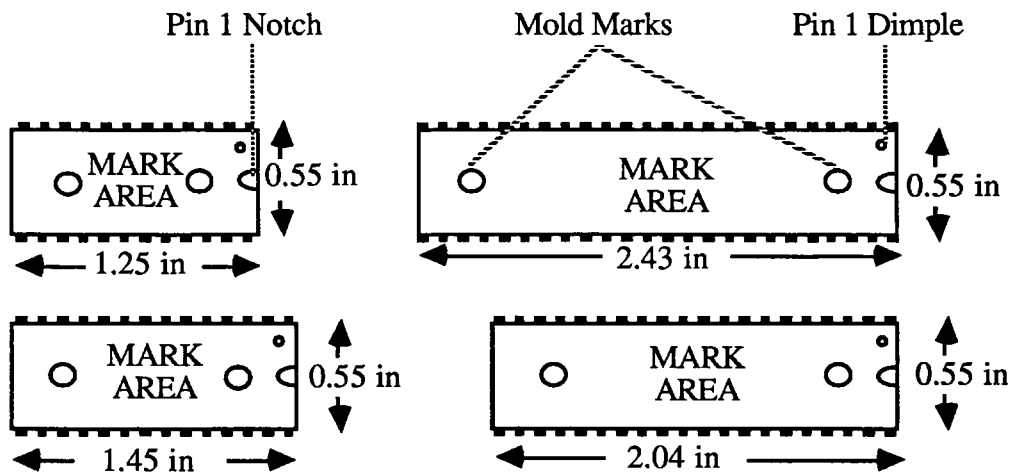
Drawing And Nomenclature of the DIP Package.
